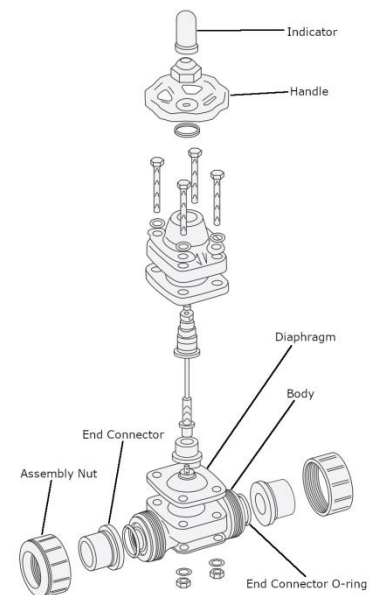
Exploded View of DAB Series Diaphragm Valve
